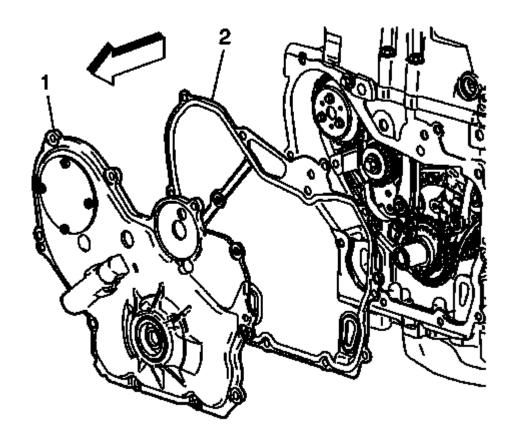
Engine Front Cover And Oil Pump Courtesy of GENERAL MOTORS COMPANY
